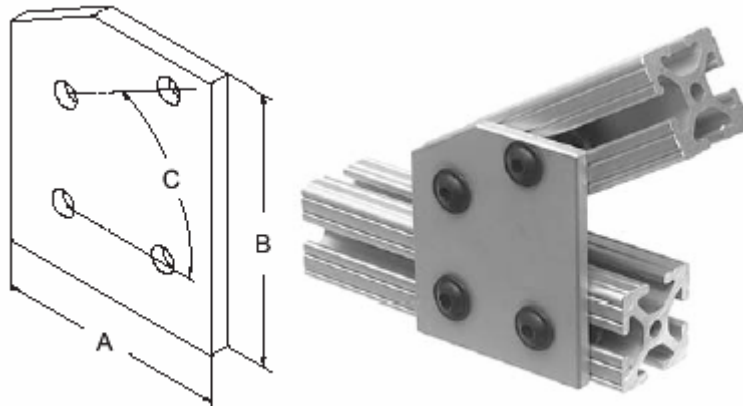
Engineering drawing and an example of the 30° connection bracket we will be using to connect the 8020 for the control panel
